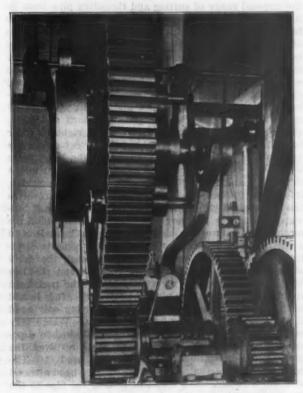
Detail of the Gearing and Clutch Mechanism of Pawtucket Cold Nut Press.
